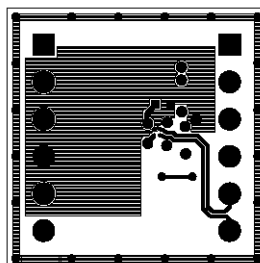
SMP-TPS7A1601-MVK Board Layer 4 – Bottom Side
